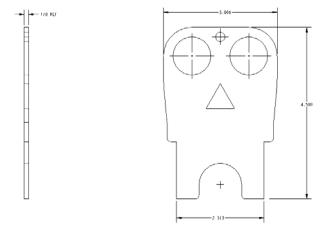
Tensioner Gauge Tool (300-B-179)
